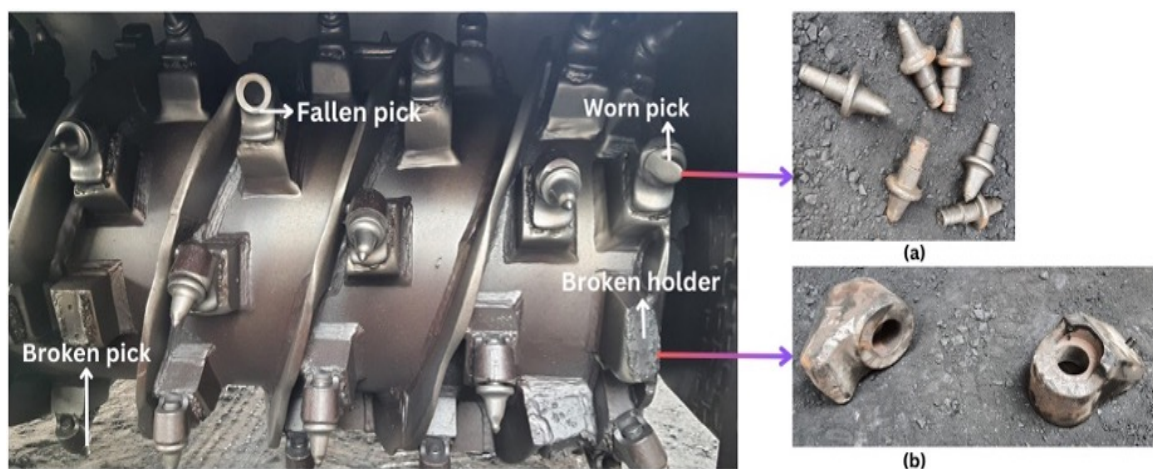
High wear items of SM cutting drum for coal production: a) pick loss; b) holder loss
